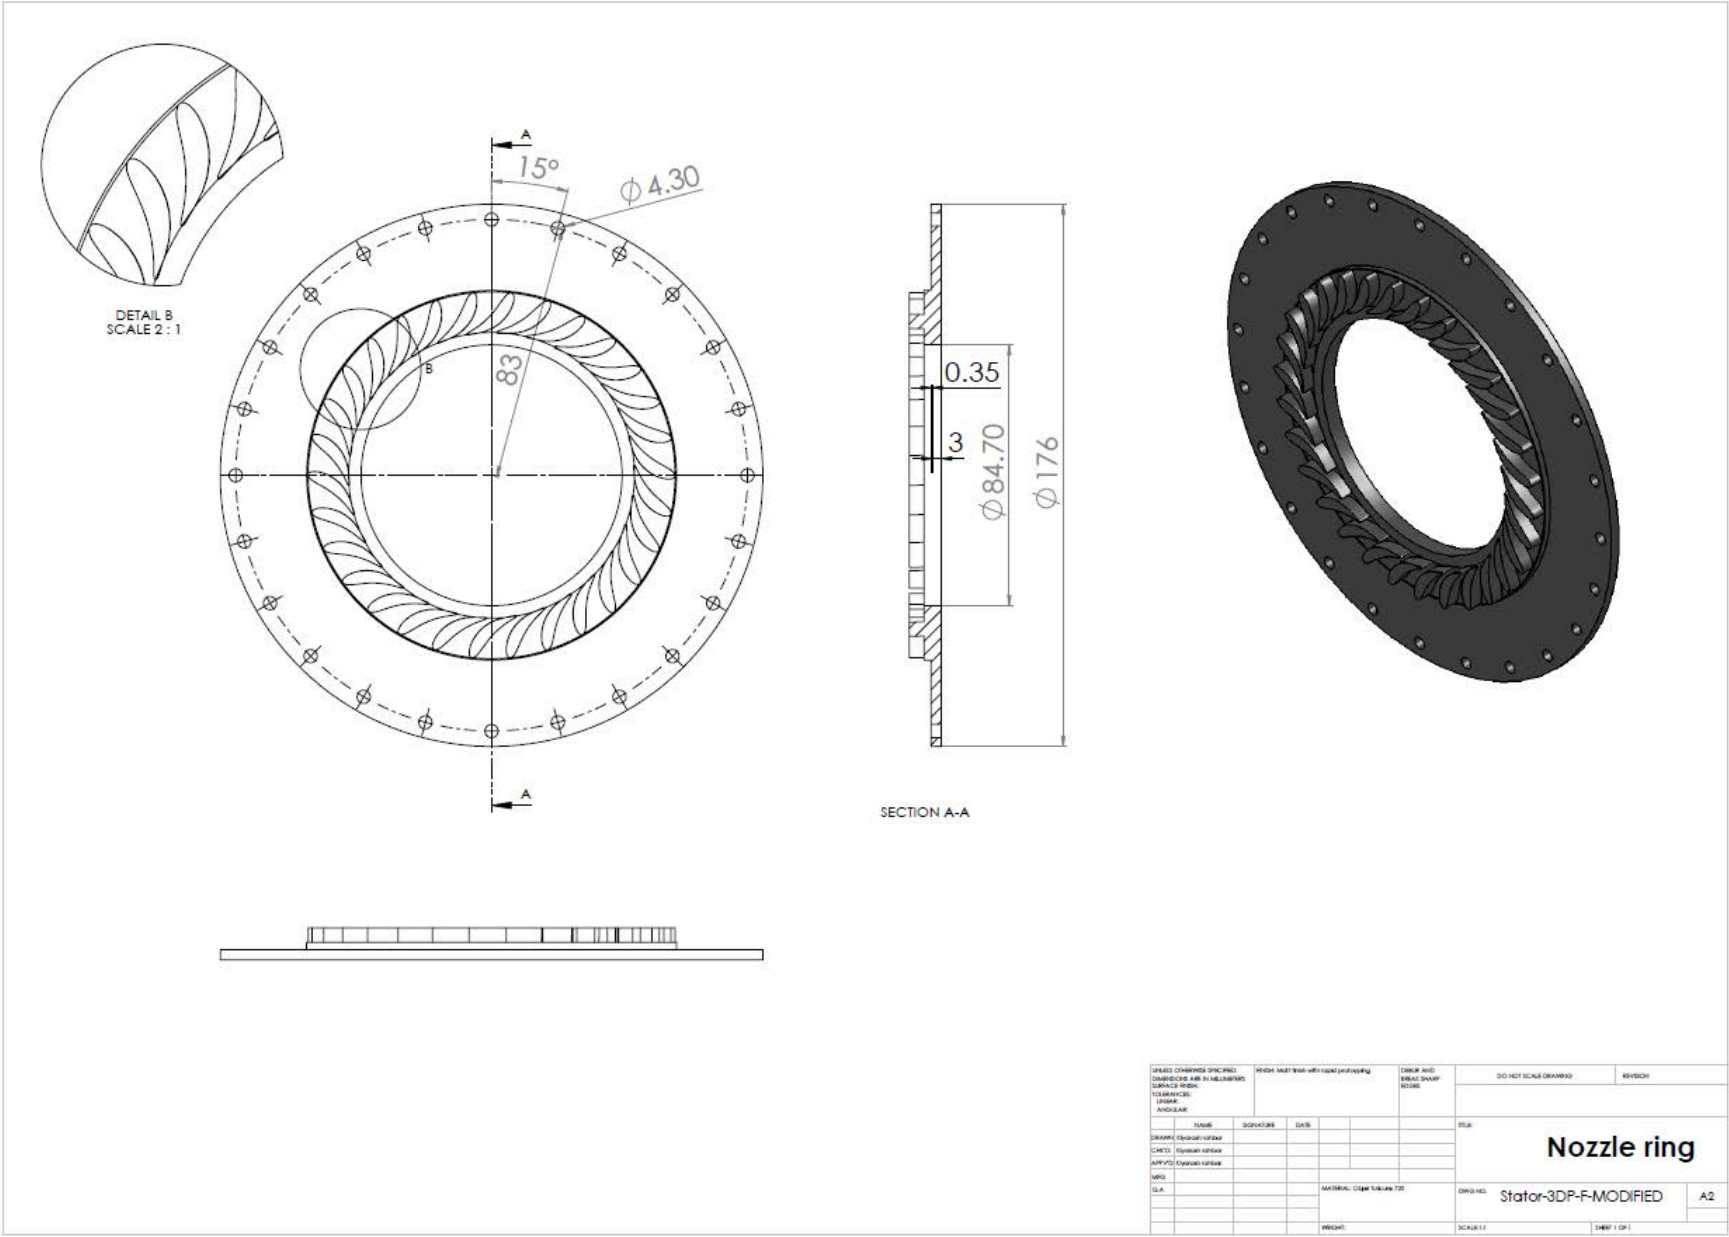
Nozzle ring –detailed two-dimensional drawing
